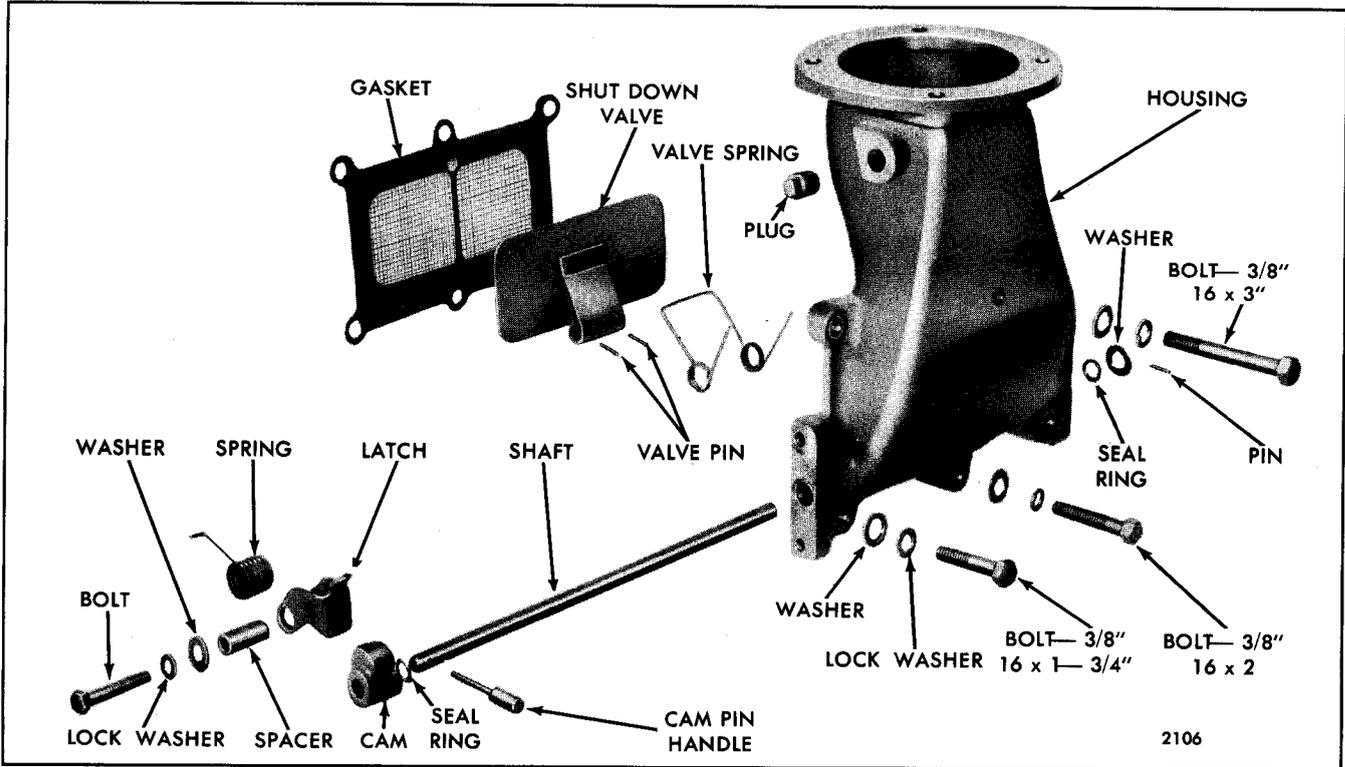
Typical In-Line Engine Air Shutdown Housing Details and Relative Location of Parts
